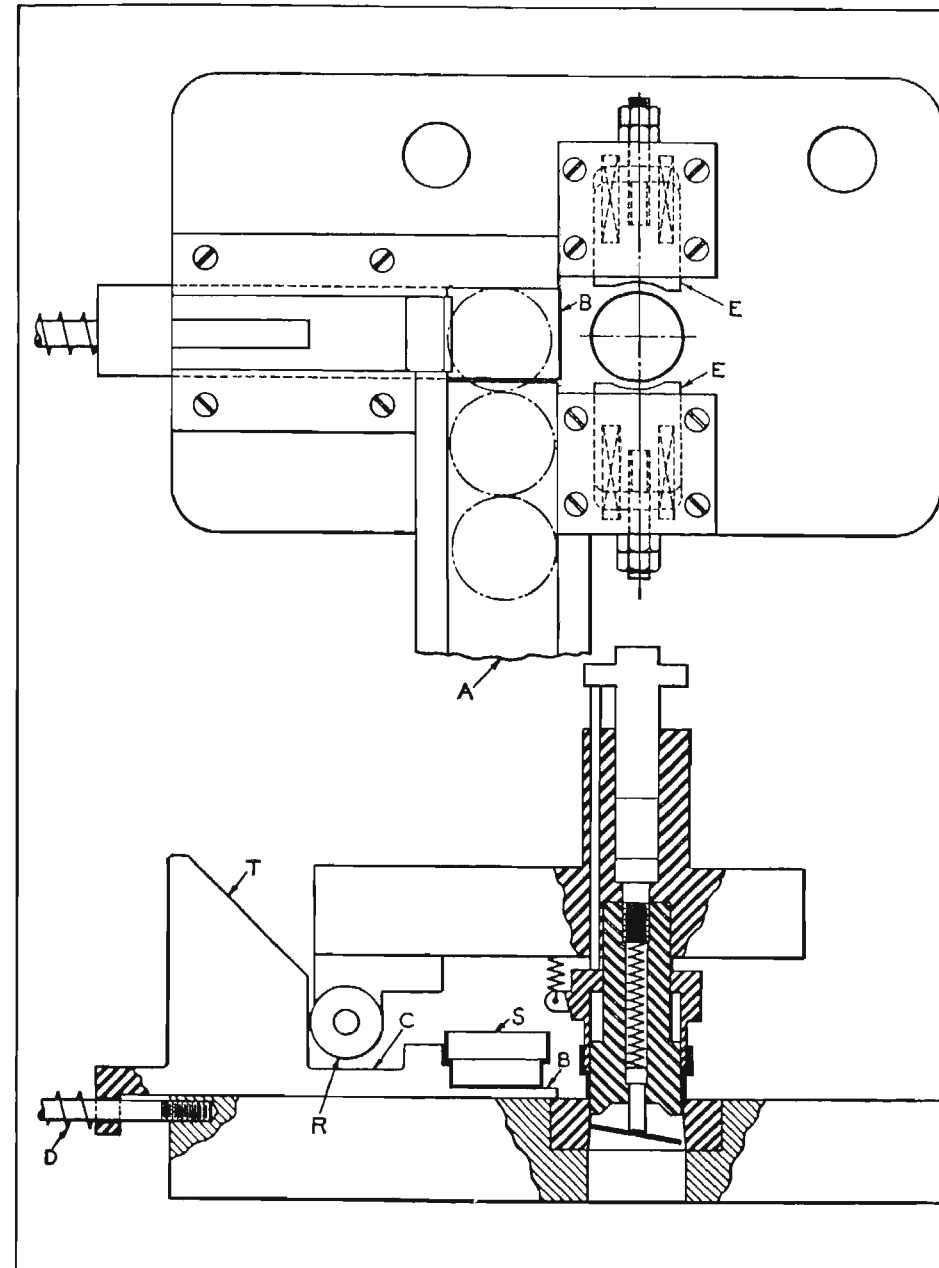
Die Equipped with Automatic Feed which Locates Drawn Shells under Punch.
